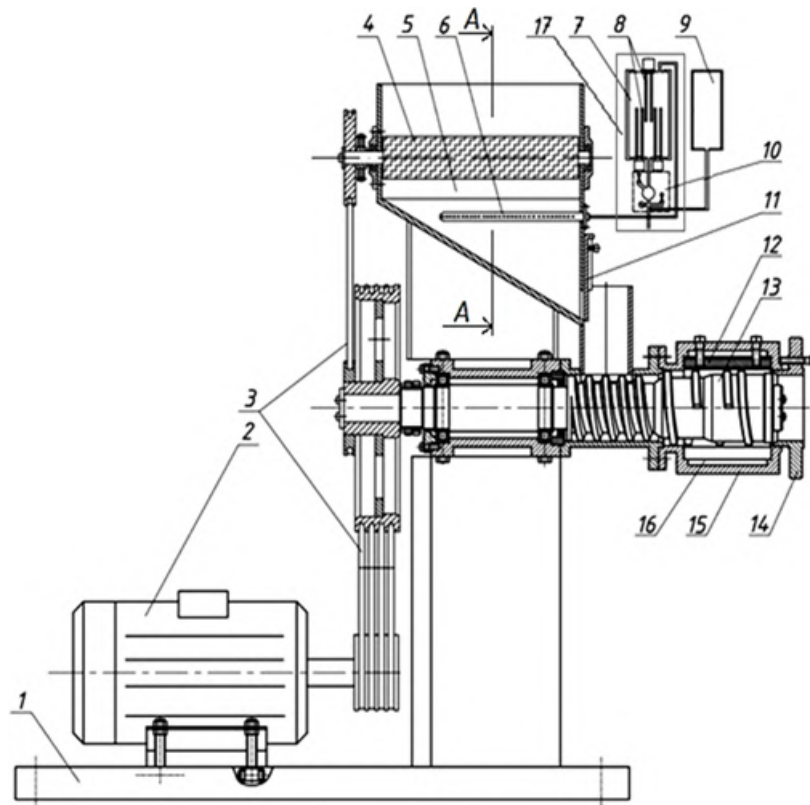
Energy-efficient screw oil press with a steam-generating device for wet-thermal processing: 1 – carcass; 2 – electric motor; 3 – V-belt transmission; 4 – rifled rollers; 5 – receiving hopper; 6 – steam atomizer; 7– heat exchanger; 8 – tubular electric heater; 9 – expansion tank; 10 – hydro groups; 11 – valve; 12 – tension wedge; 13 – screw shaft; 14 – adjustable nut; 15 – perforated cylinder; 16 – perforated panels; 17 – steam generator.
